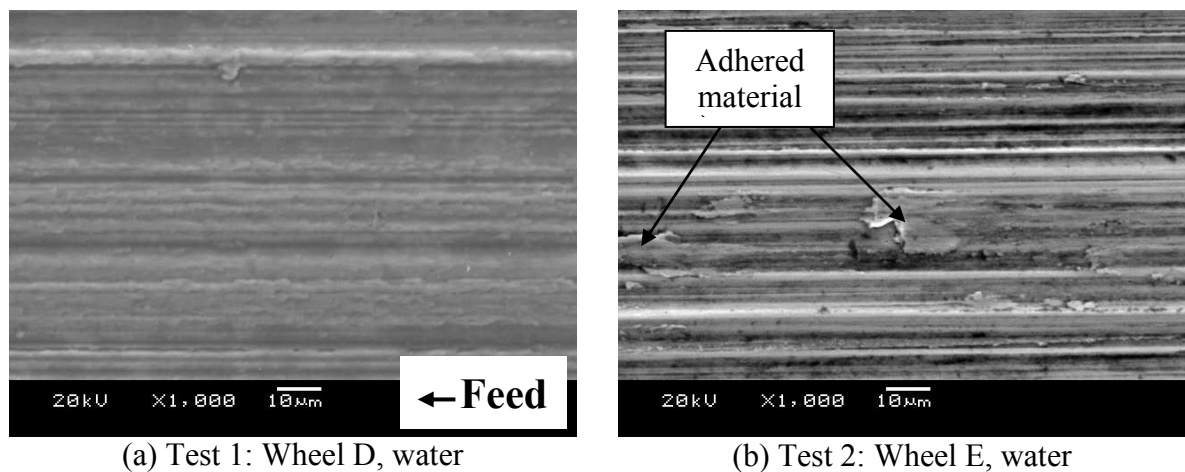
Higher magnification images of the machined workpiece surface (Phase 2Bi)
